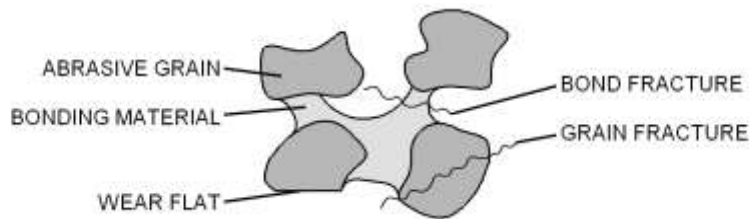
Detailed view of grain fracture, bond fracture, and wear flats.
